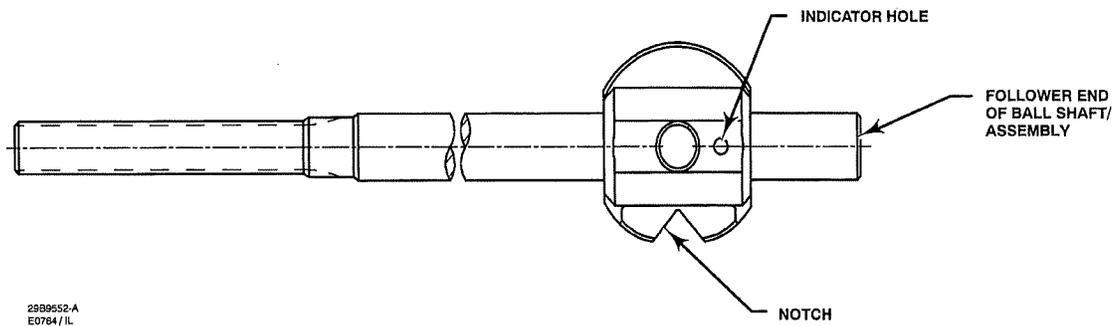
Location of Indicator Hole in Micro-Notch Vee-Balls
